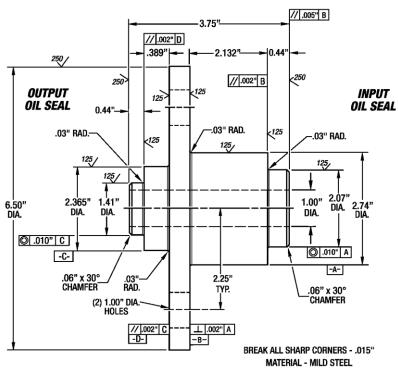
Options - Manifold Mounted Valve Kit, Male Input Adapter Kit & Foot Mounting Kit
